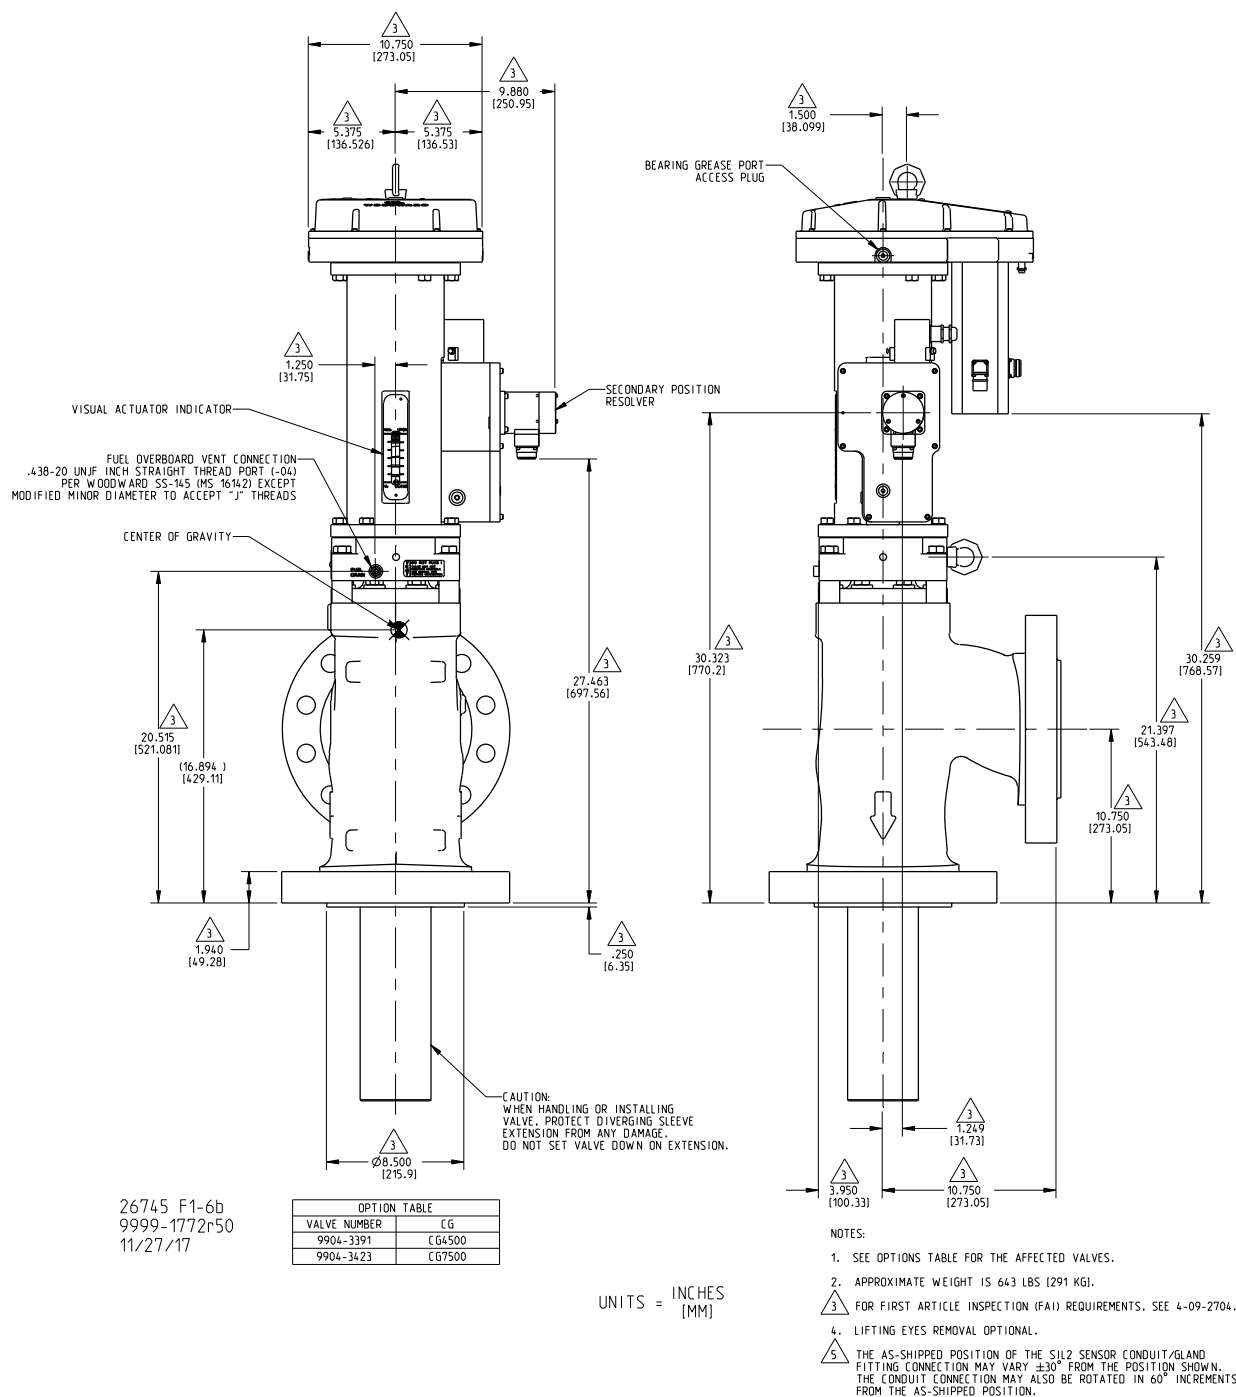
Outline Drawing (6-Inch UHR LESV)
